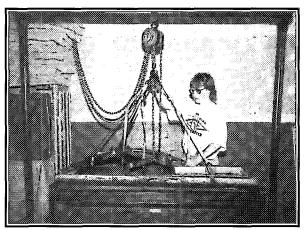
Hoisting out the plate. Plate flange has cleared the stretcher.
